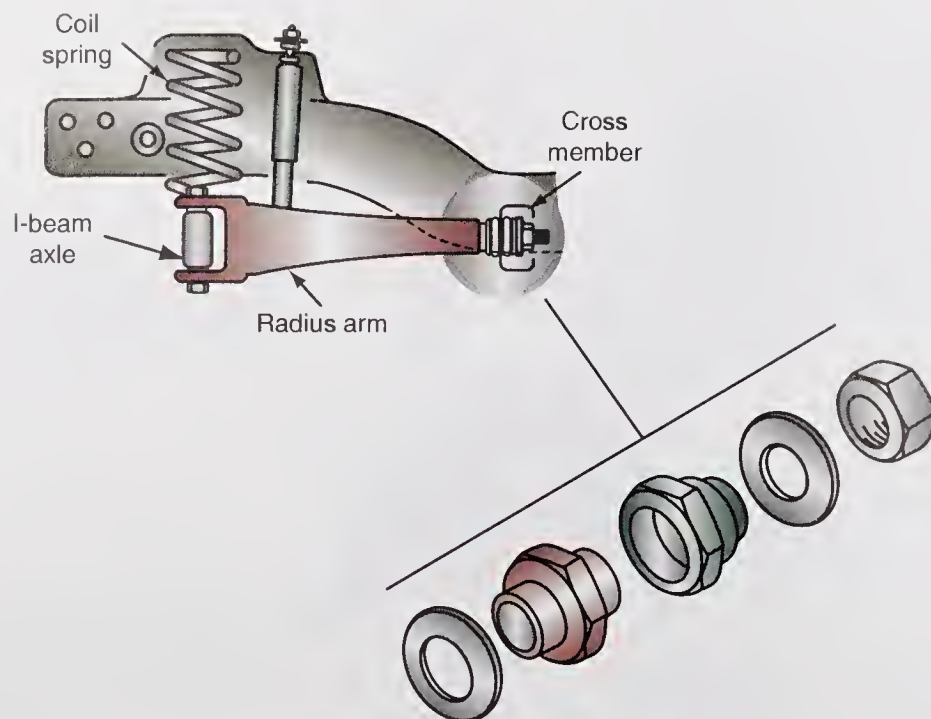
Radius arm bushing for caster adjustment on some twin I-beam suspension systems.
